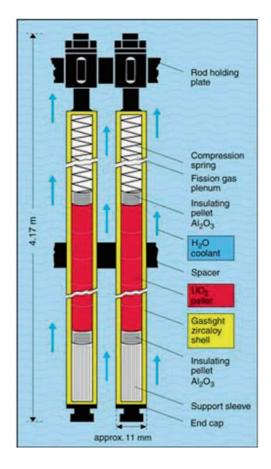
Basic steps in fuel rod and fuel assembly construction (Printed with permission from [20]).
